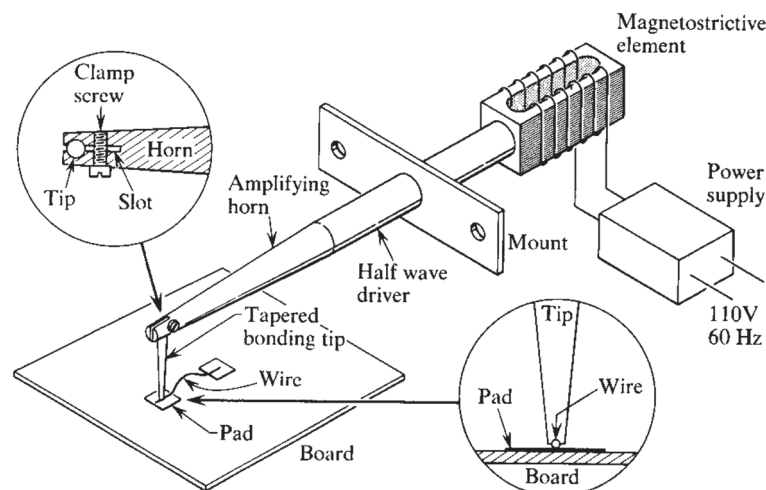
Ultrasonic welding procedure [Dush71].
